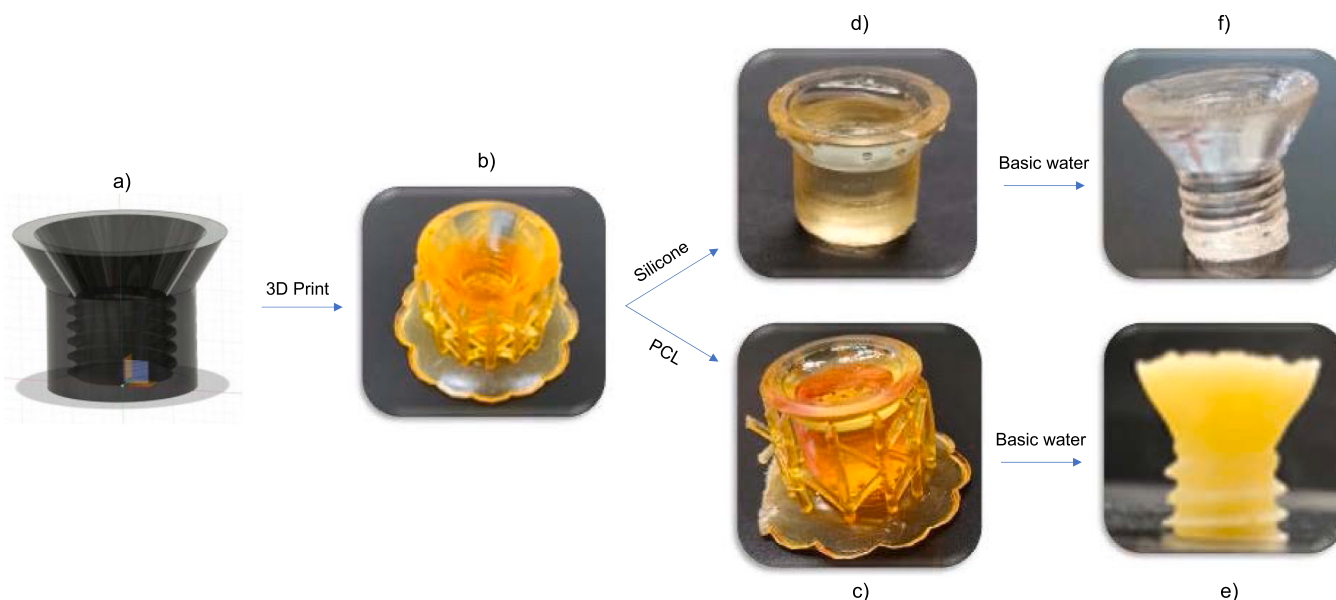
Scheme of the proof on concept to prepare PCL or silicone screws using the sacrificial molds described in this work. a) Digital design of the mold. b) Printed mold. c) Printed mold filled with the molten PCL (100 °C). d) Printed mold filled with the two components liquid Sylgard 184 (please note that in this case the print support columns have been removed). e) Final PCL screw. f) Final silicone screw.
